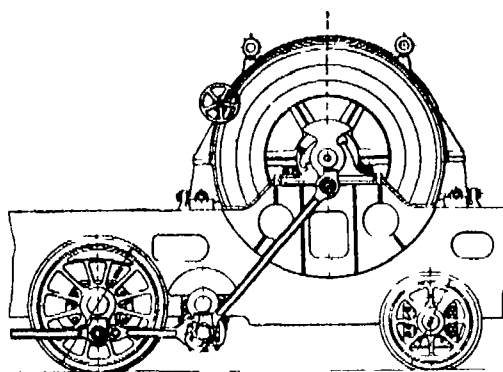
DETAIL VIEW SHOWING COUPLING OF MOTOR TO DRIVE WHEELS
